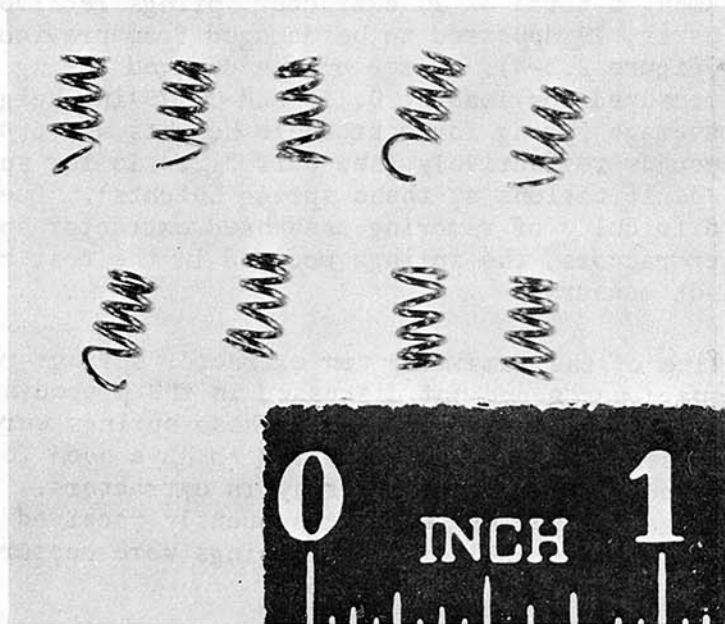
Damaged and Bent Code B Spare Parts Extractor Springs.
